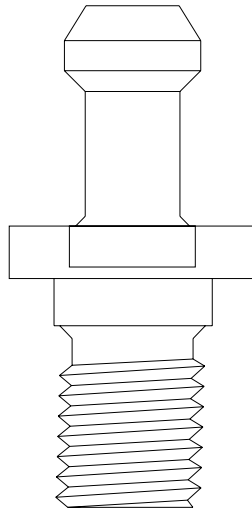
Retention knob as used in the top of tool assembly for clamping and releasing purpose as used in a CNC machining centre.
